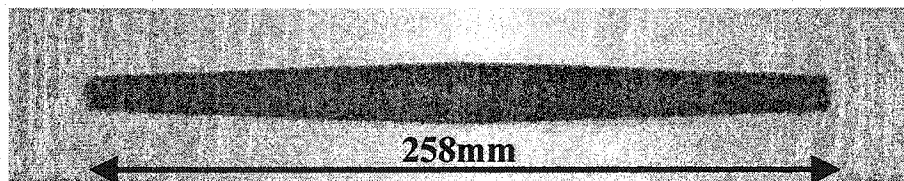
Double-taper shape clad steel buffer rod having the length of 258mm used for ultrasonic probe.
